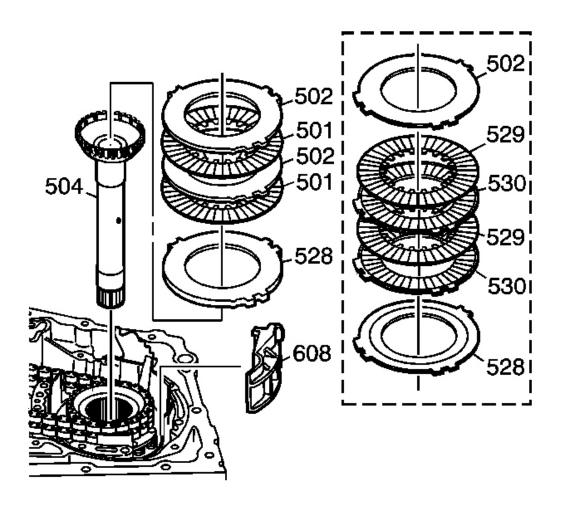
Identifying Fourth Clutch Components Courtesy of GENERAL MOTORS CORP.
